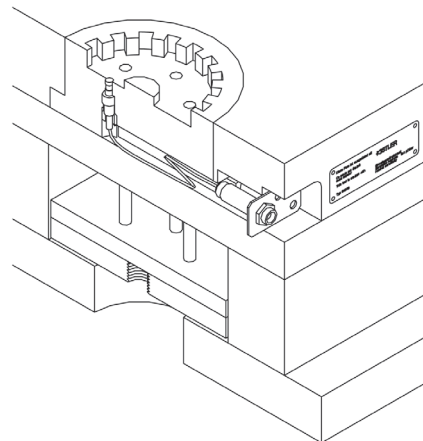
Sensor, cable, mounting plate (Mat. No. 3.520.328) and identification label (Mat. No. 3.520.899)
